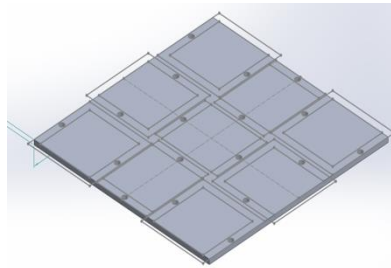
CAD Model of 9 TEG module Placement with a heat sink on Aluminum Plate
